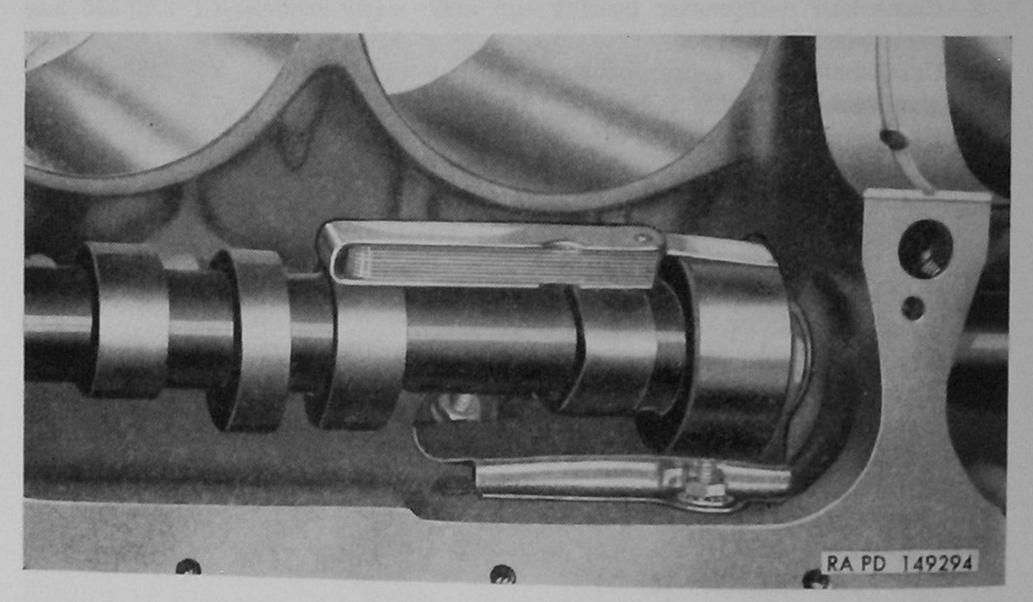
Checking camshaft bearing clearance with feeler (thickness) gage.
